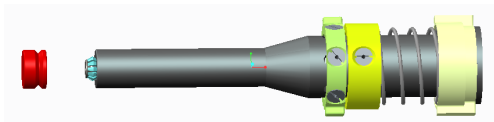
Drawing of the pug holder that will fit into the back wall of the gun cavity. The small CuBe spring that holds the plug is locked tightly and can be opened by a mechanism inside the holder rod.
